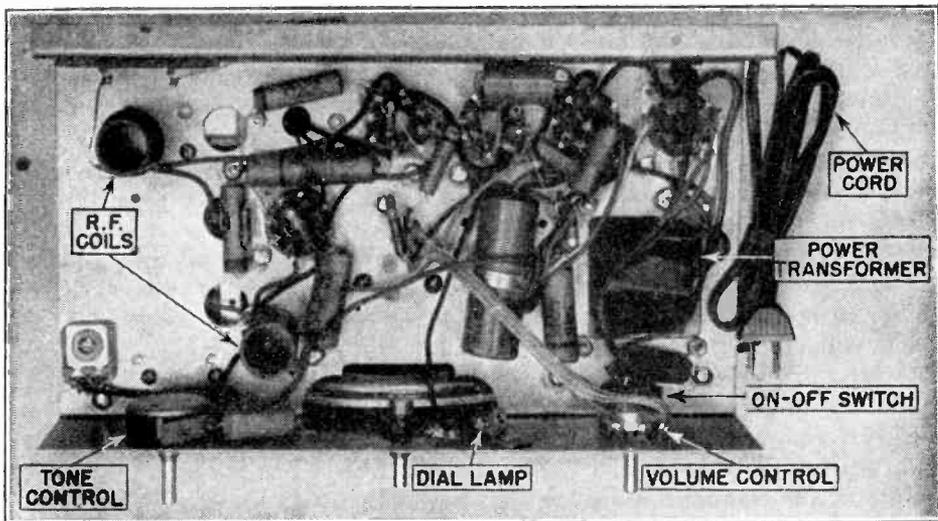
Additional under-chassis parts of our superhet receiver are identified in this view.
